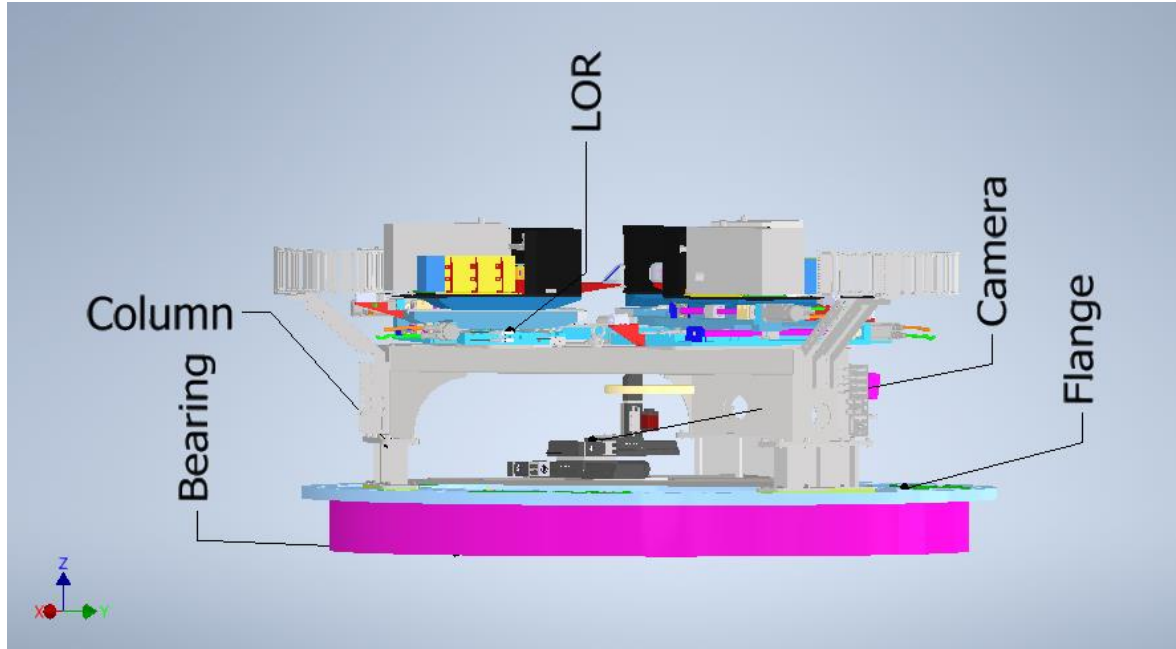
The assembly consisting of the bearing, the test camera system and the LOR WFS
